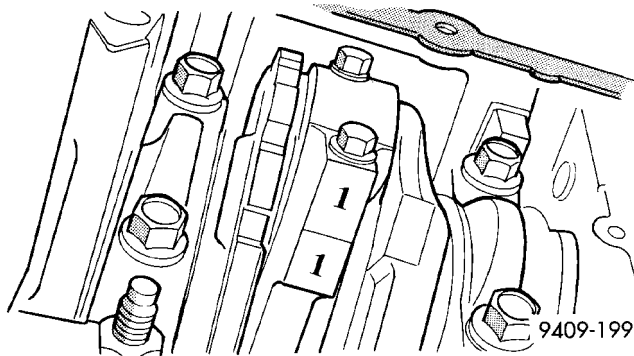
Identify Connecting Rod to Cylinder - Typical
